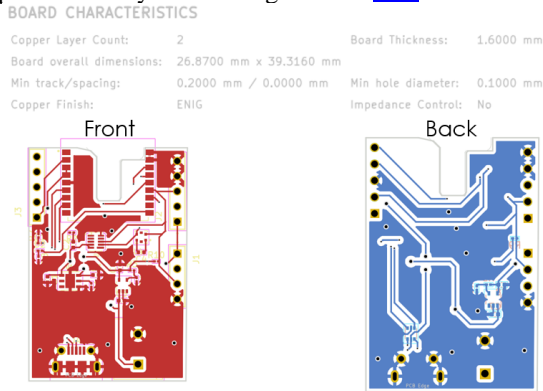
PCB layout top and bottom layers, also indicating the size of the PCB.
